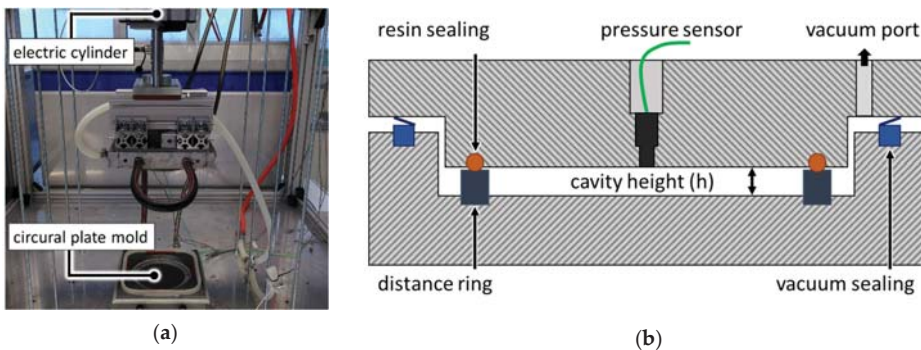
(a) experimental setup for D-SCM sandwich manufacturing, (b) schematic cross section of the circular plate mold.
